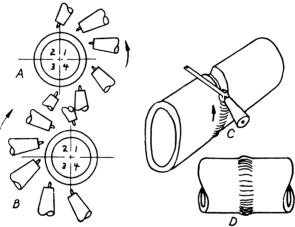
The fixed method of welding pipe: A. Starting underneath and progressing to the top on one side, B. Starting underneath and progressing to the top on the other side, C. Portion of torch and filler rod, D. Appearance of finished weld
